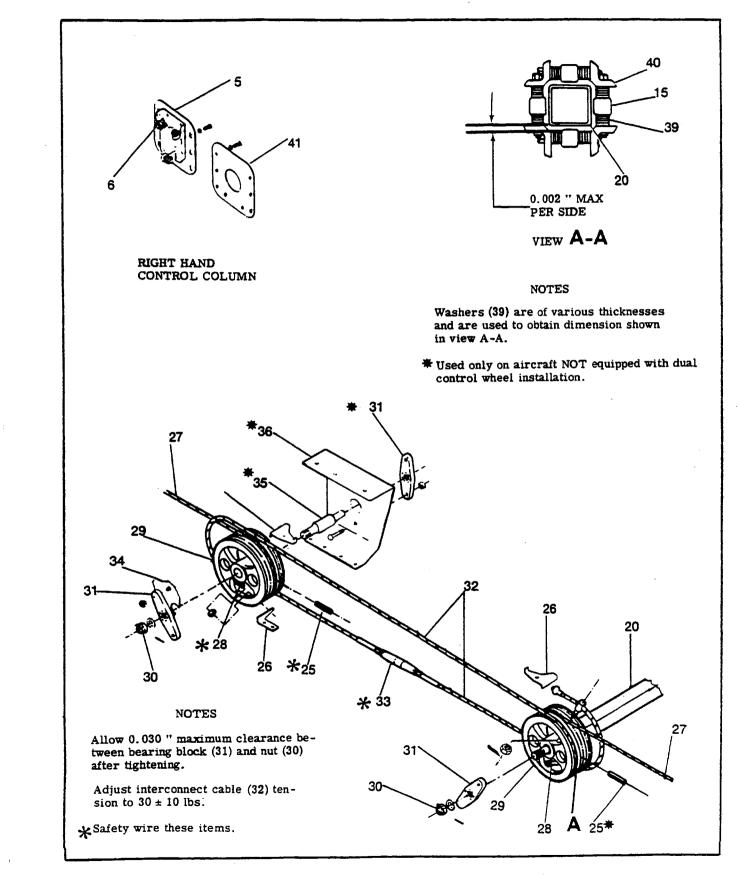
Control Column Installation (Sheet 2 of 5)
